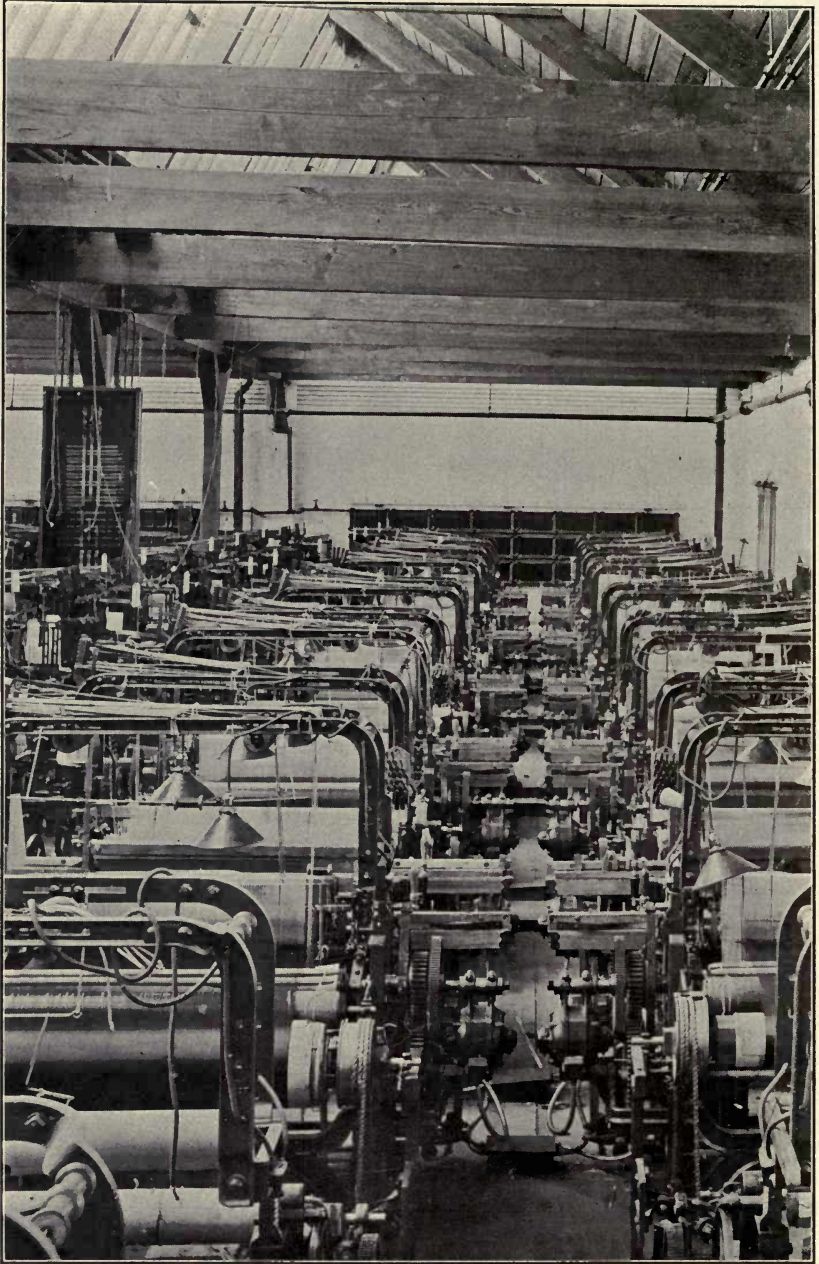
PLATE B. — SILK-WEAVING SHED WITH MOTOR DRIVE.
